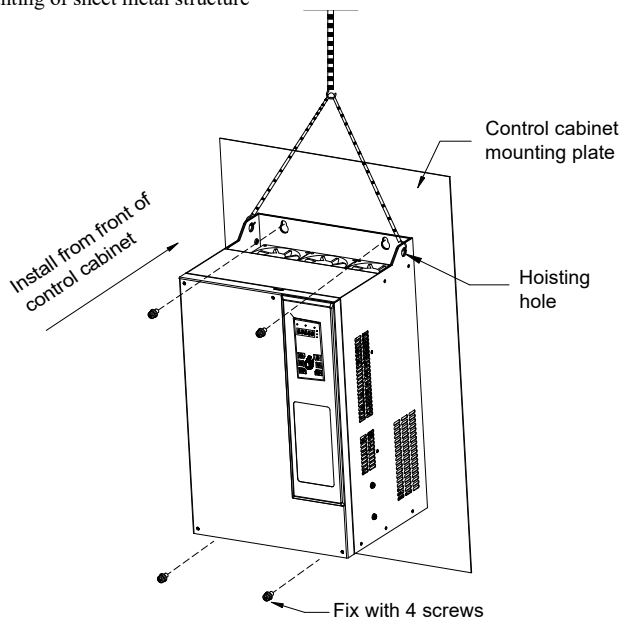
Wall-mounted Installation Diagram of Sheet Metal Structure
